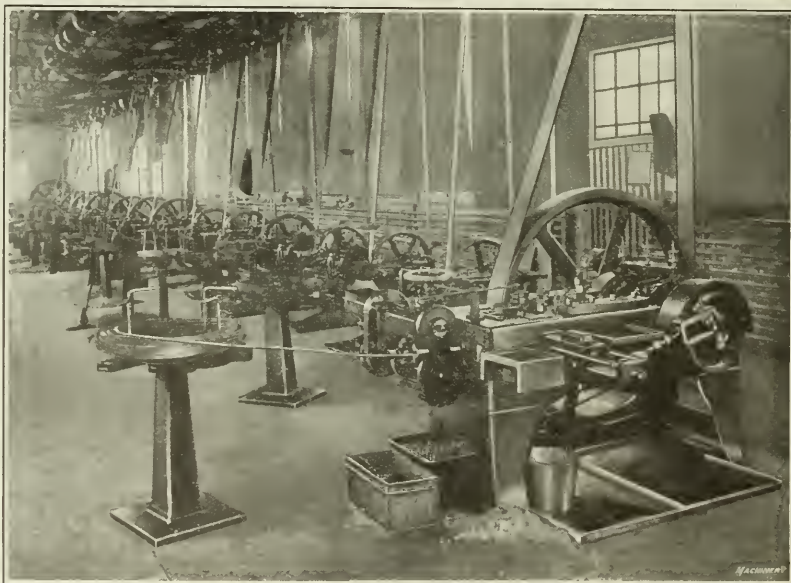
General View in Cold-header Department; Blanks for All Sizes of Balls up to  $\frac{5}{8}$  Inch Diameter are made on Cold-heading Machines
